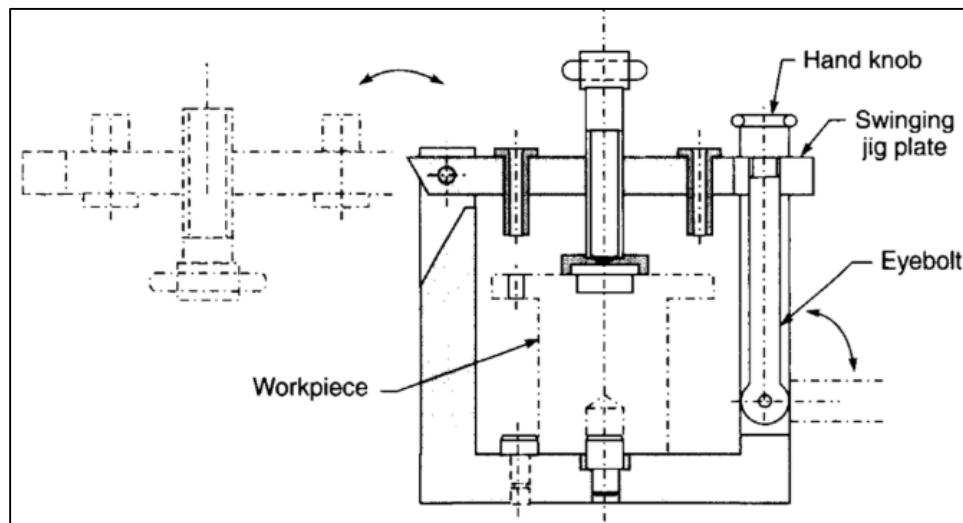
(g): Leaf Jig (Joshi, 2003)
